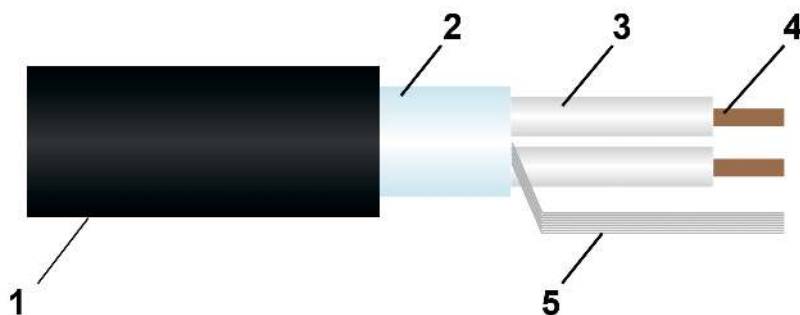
Construction of Shtein® Heizkabel DS heating cable
